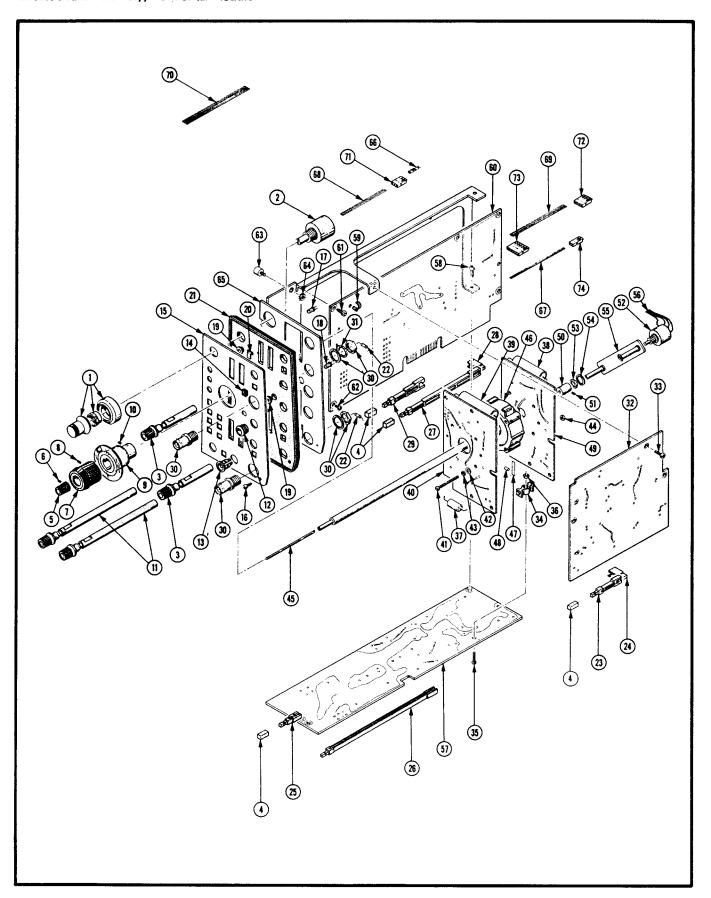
Circuit Board Assembly, Horizontal Module.
